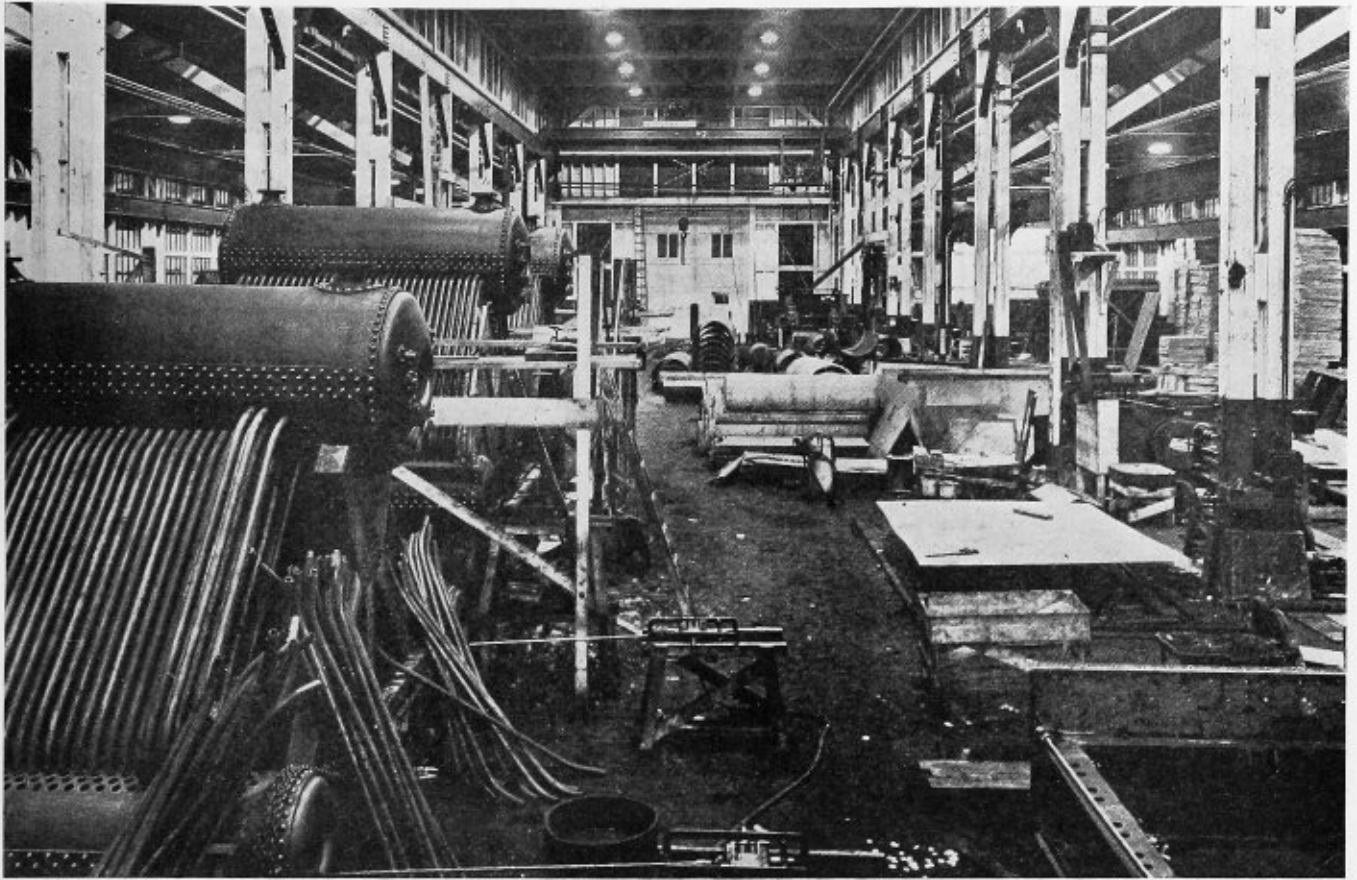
Drums Arranged on Assembly Racks for Installation of Tubes
